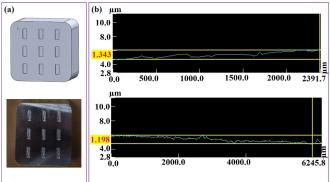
The aluminum mold. (a) Design of the aluminum mold and fabricated aluminum mold; (b) lateral (top image) and longitudinal (bottom image) parallelism measurements between bottom surface of a nest and aluminum rigid mold.
